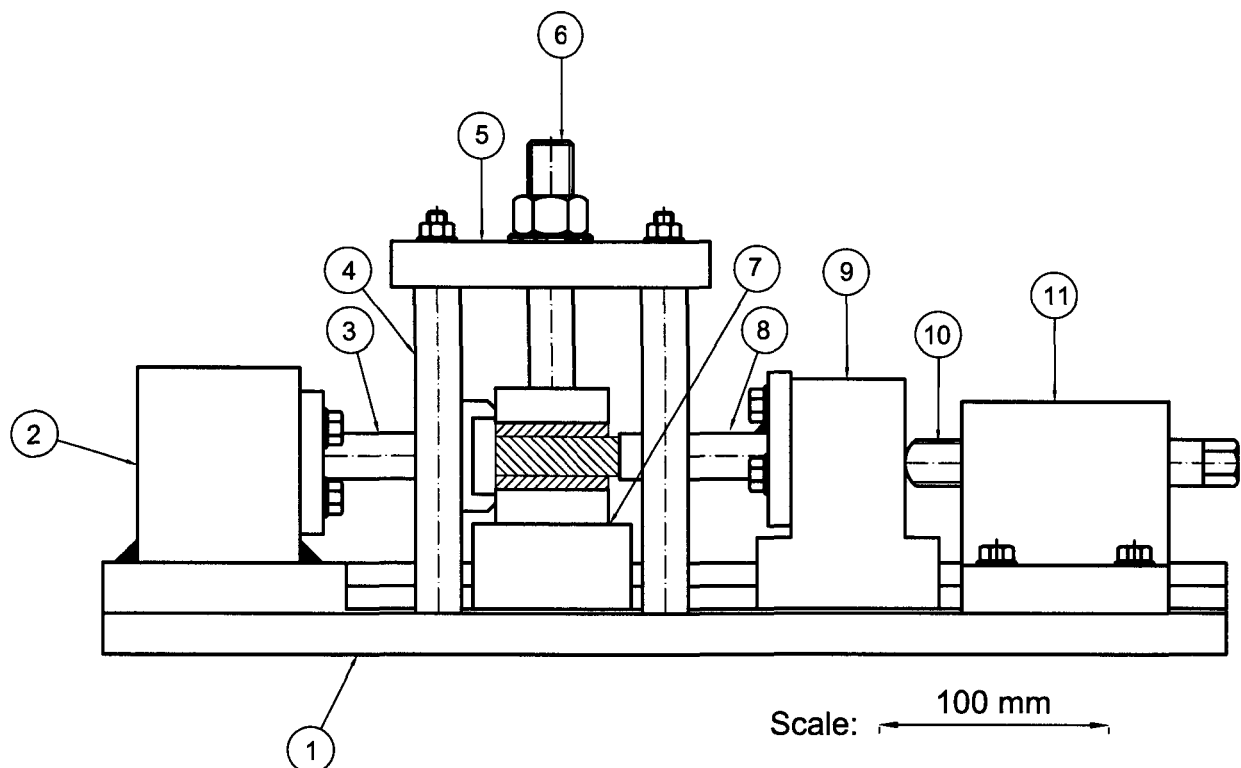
Technical drawing of the CCLAB TENSILE-SHEAR EXPERIMENTAL DEVICE
